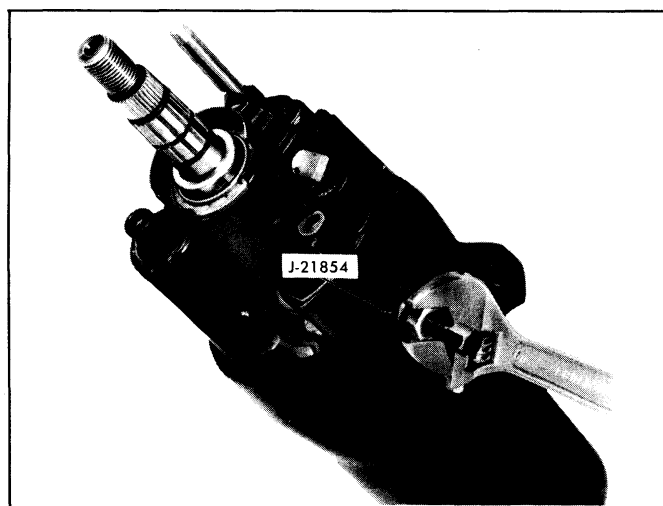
B-91--Removing Bearing Housing Pivot Pins
